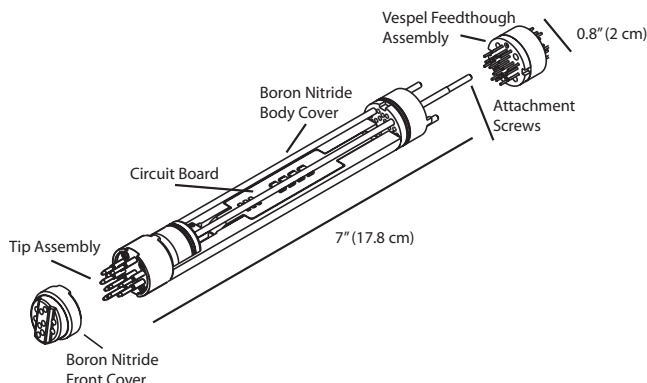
CAD drawing showing a head overview with the main components (BN shells, Vespel connectors, circuit board, and tip assembly), and the attachment screws holding it together. Notice the screw-in tip assembly and easily removable BN tip cover.
